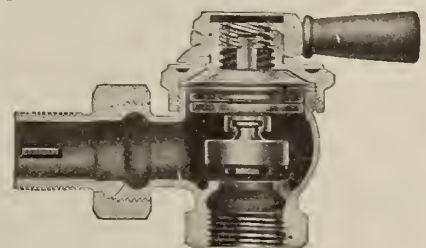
DUNHAM PACKLESS RADIATOR VALVE
